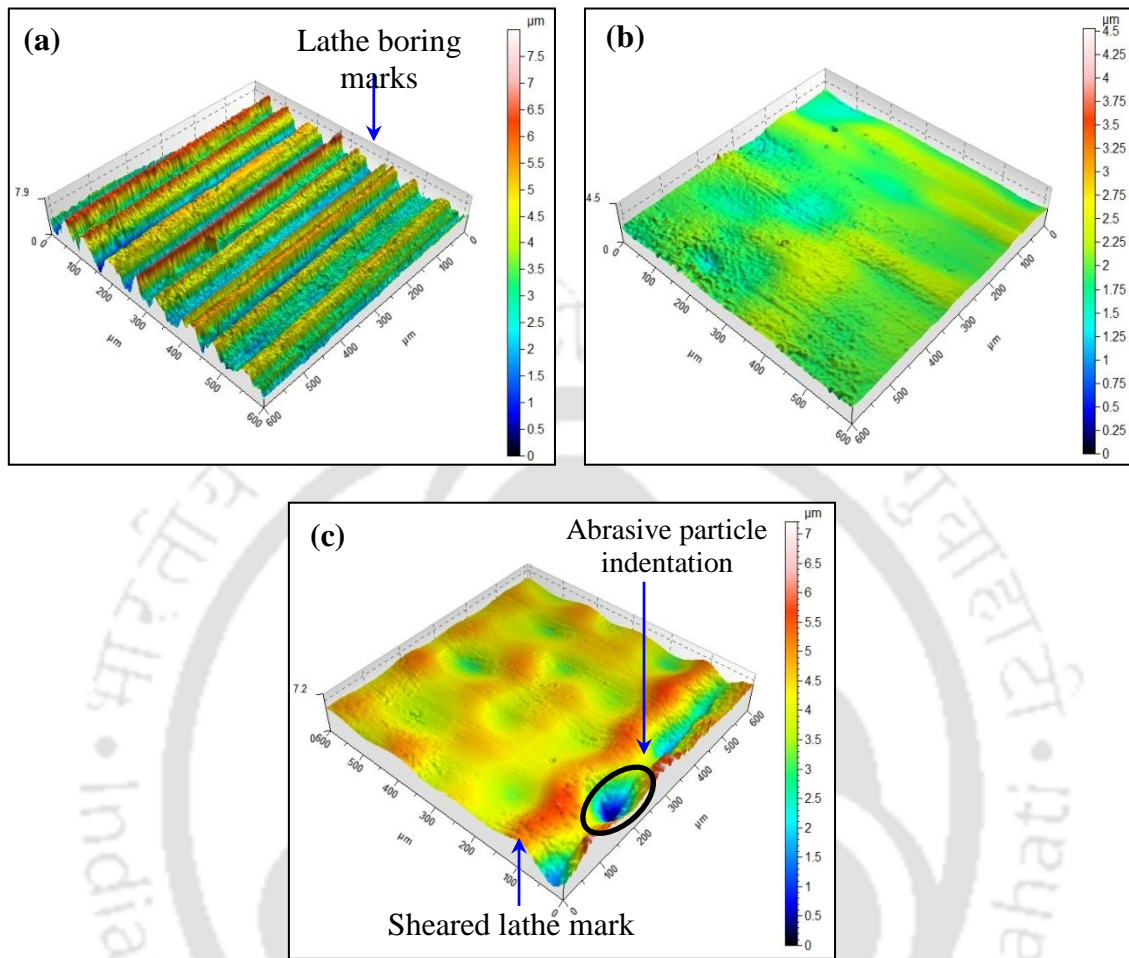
Workpiece surface at various extrusion pressure (a) initial workpiece surface (b) 4.5 MPa (c) 5.5 MPa (500 cycles, # 400, 40 wt. % abrasives).
